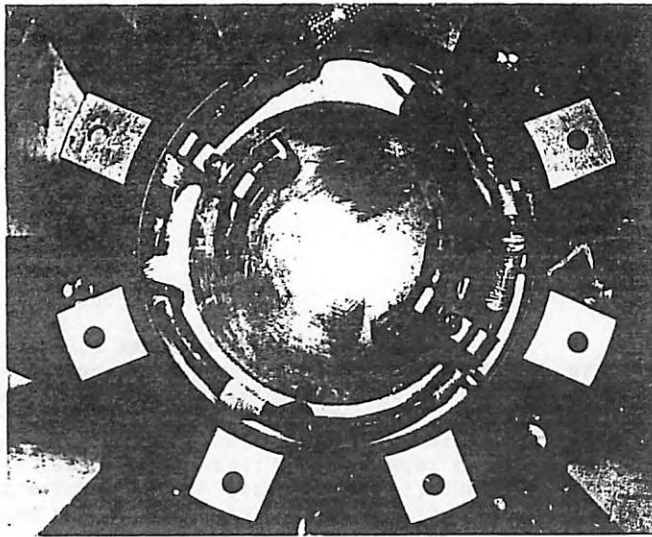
Aft Hermetic Seal Showing Cable Pinch-off Tubes
